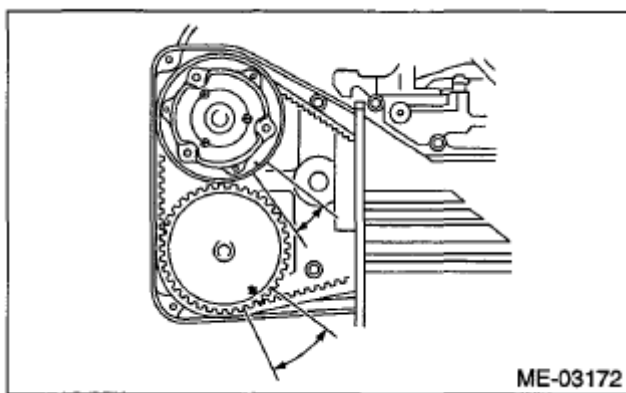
Measuring Clearance Of 2 Cylinder Exhaust Valve And 3 Cylinder Intake Valve
